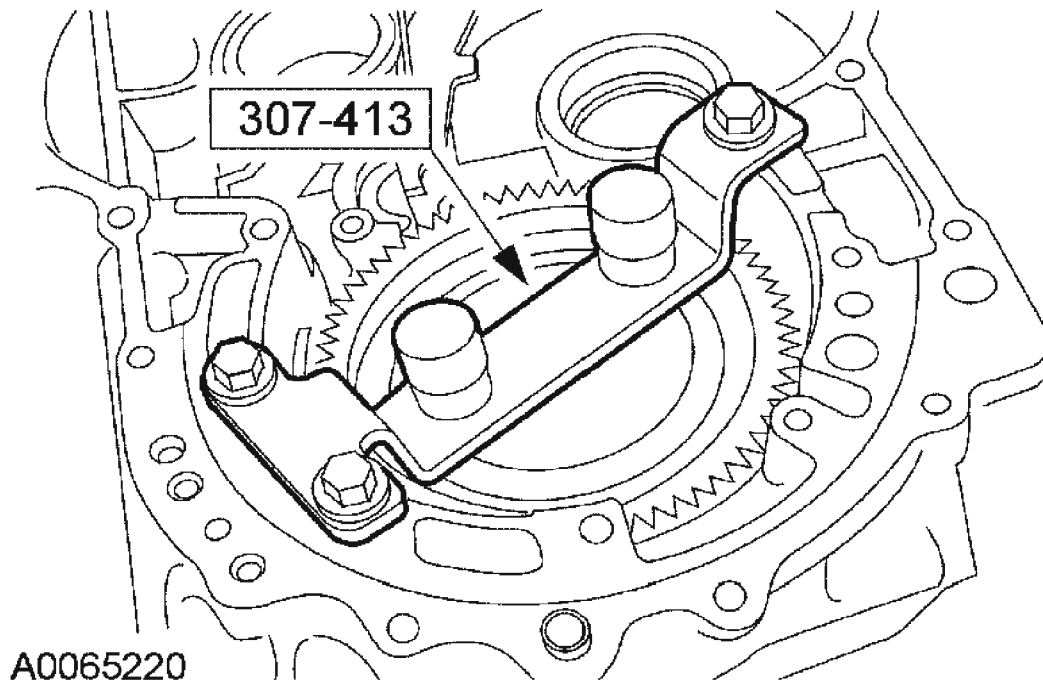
Locking Final Drive Input Gear Using Special Tool
